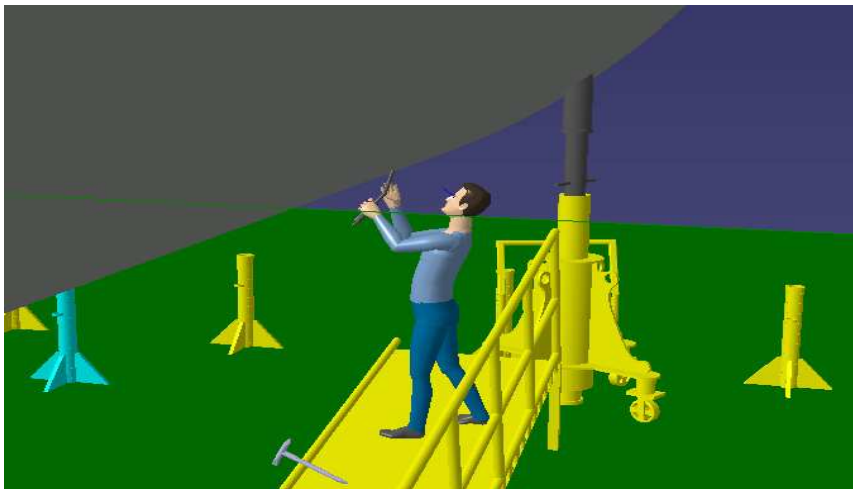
Posture model of overhead welding in standing posture.
